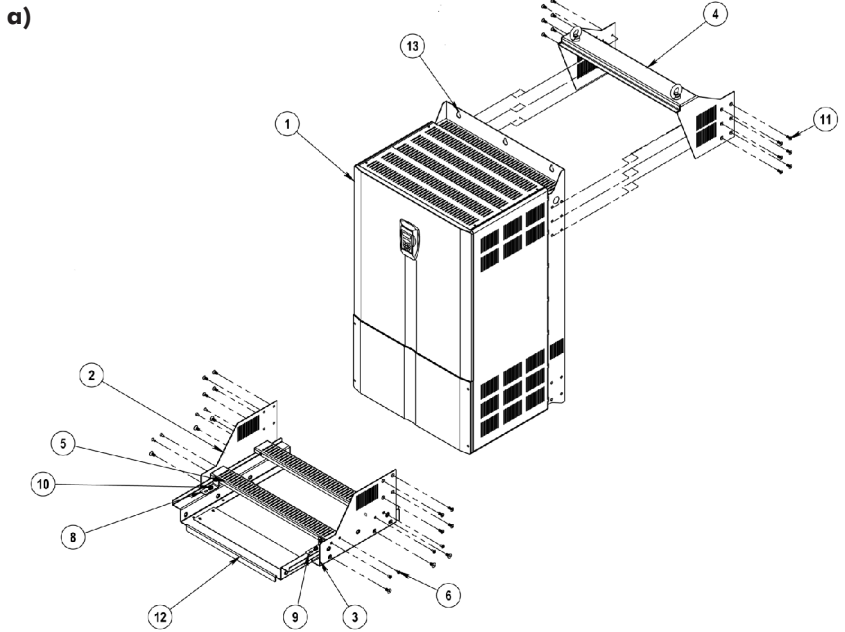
a): KME Kit assembling parts - Size 10 and 10E (800 mm wide cabinet)
